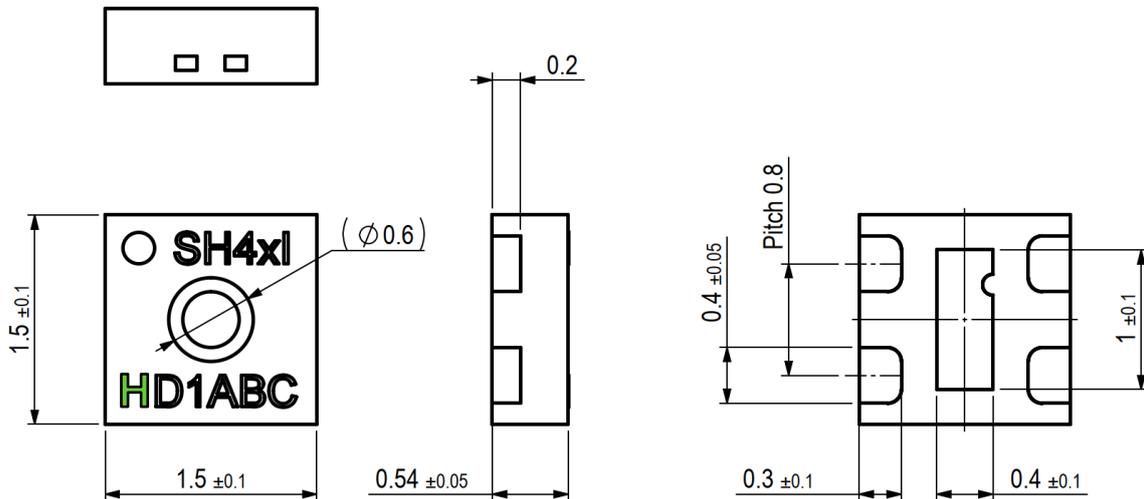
Dimensional drawing of SHT4x including package tolerances (units mm).
